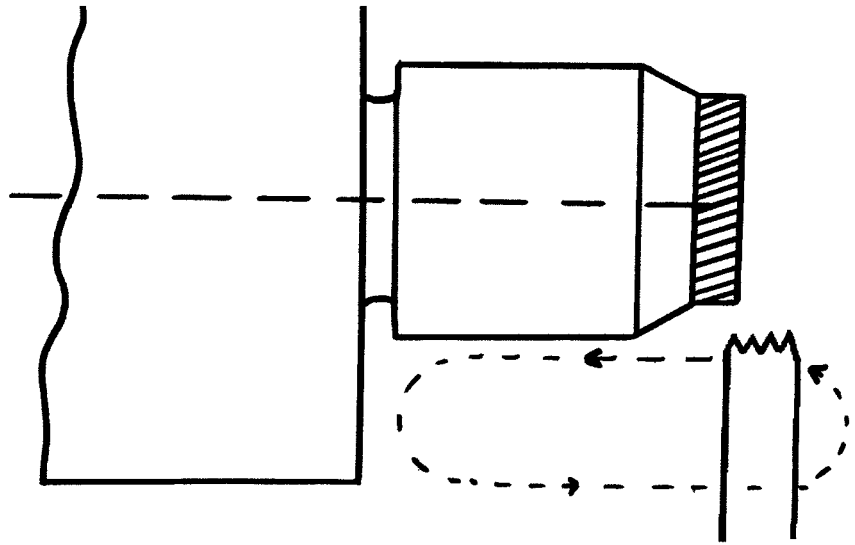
This drawing illustrates the movement of the chaser as it cuts the thread. The chaser should just cut into the recess and then be lifted clear of the wood before the chaser comes in contact with the shoulder. When the chaser just marks the shaded tenon, the thread should be ready to receive the inside threaded piece.
